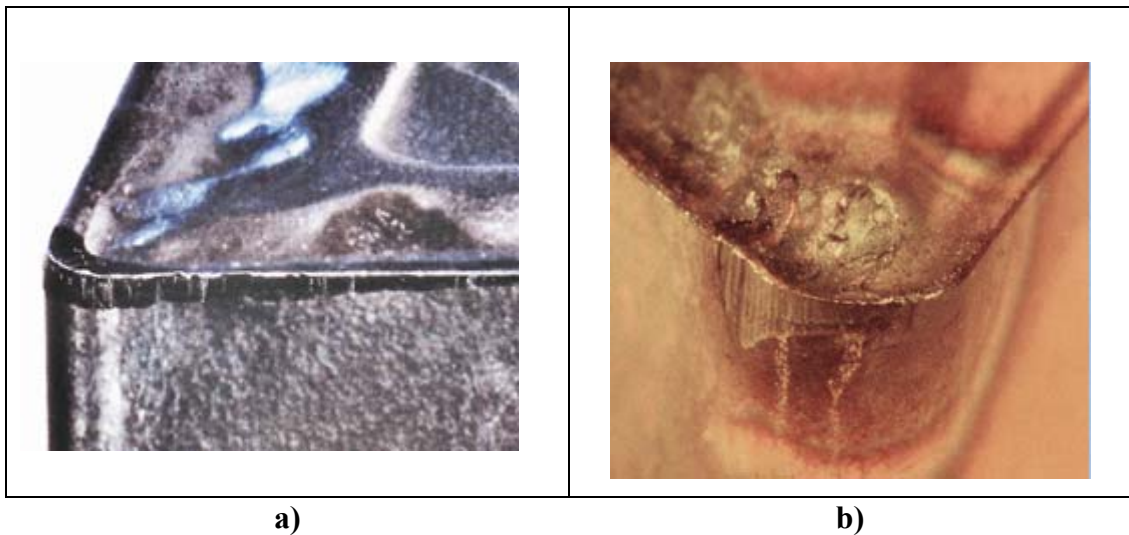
Tool wear.a) Flank wear and b) Crater wear
